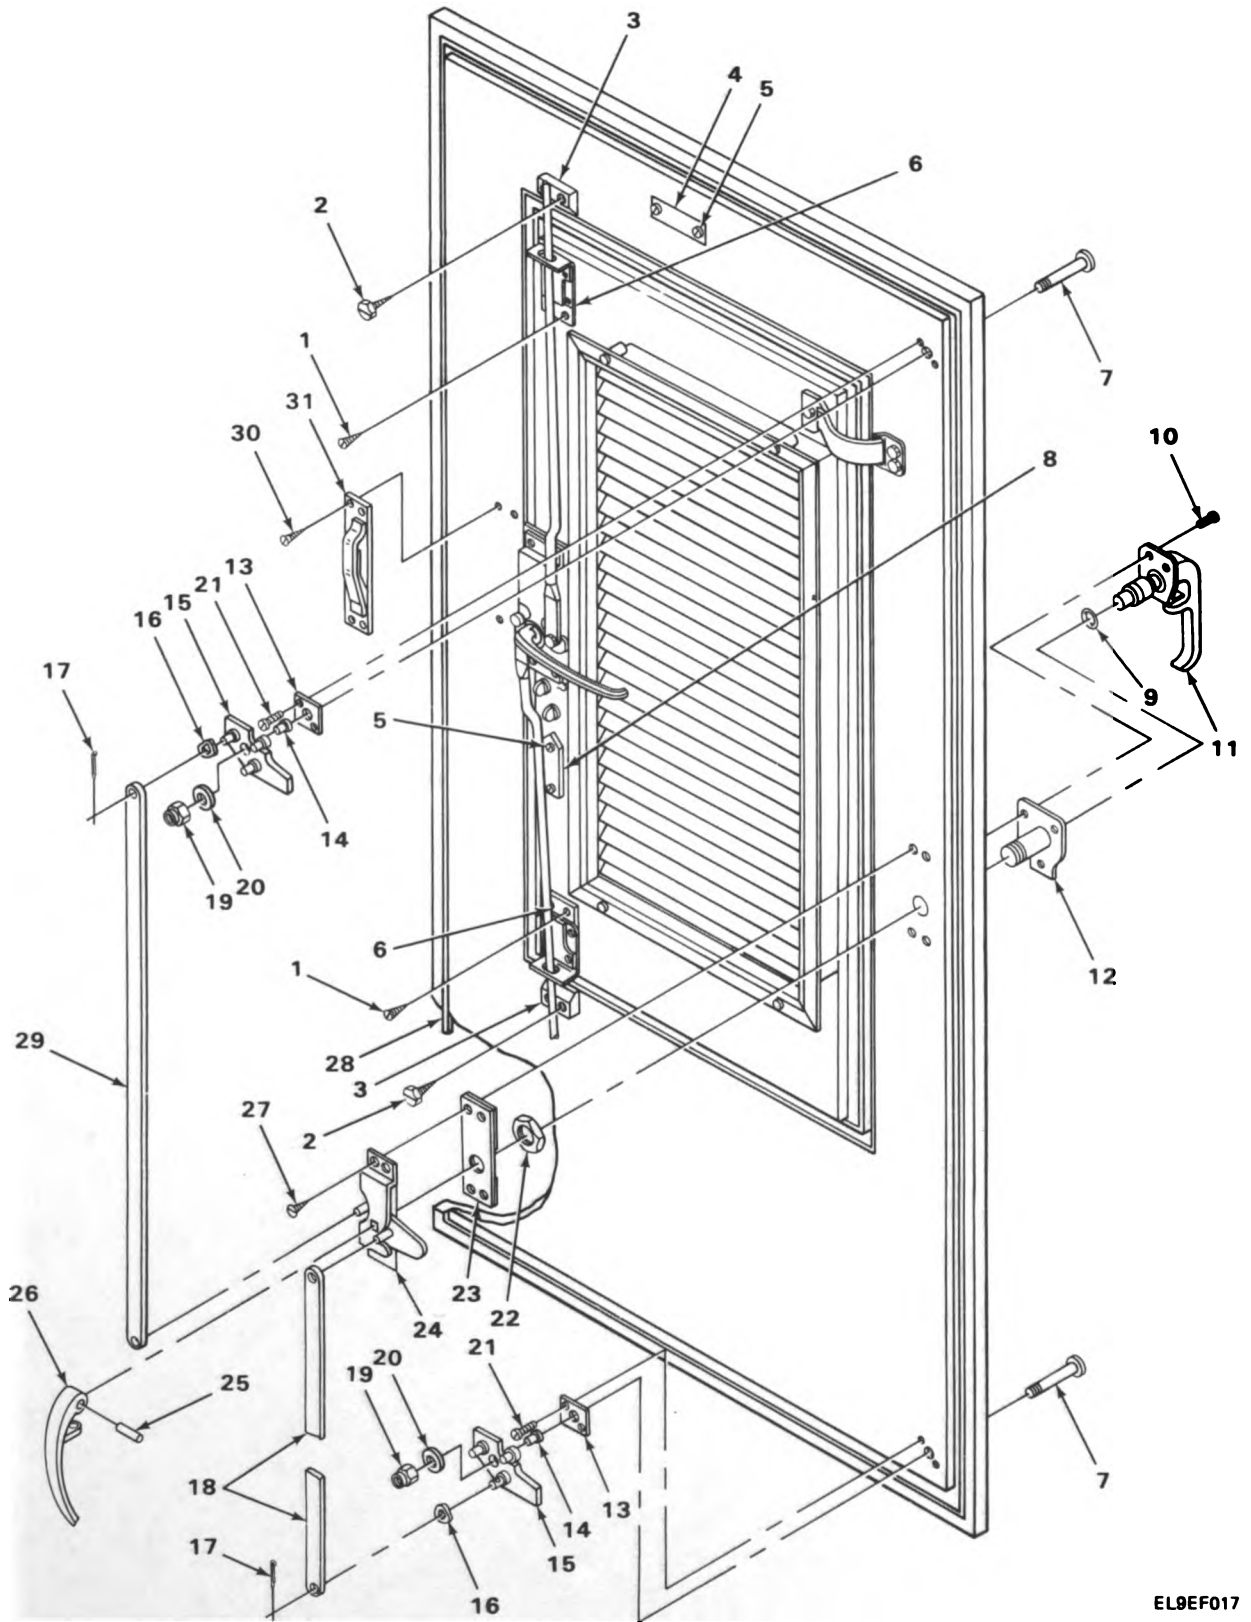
LARGE DOOR LATCH ASSEMBLY (S-318/G).
